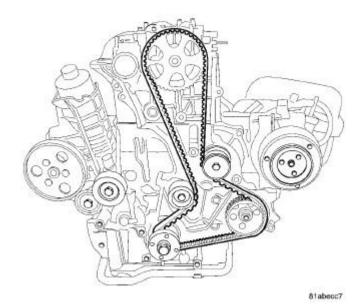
Timing Belt Courtesy of CHRYSLER LLC
